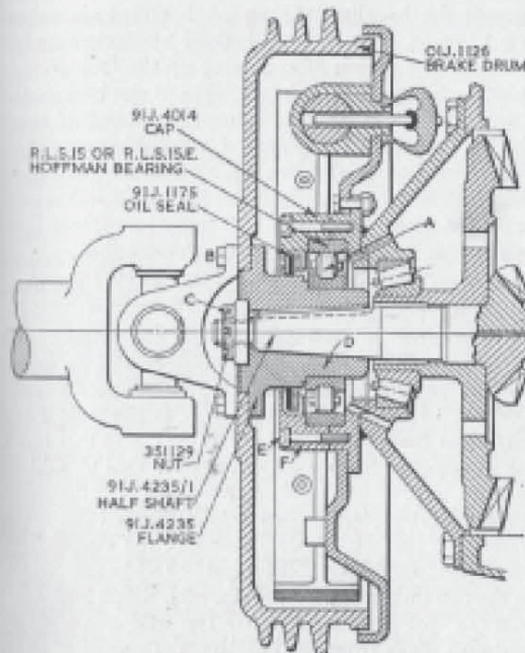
SECTION THROUGH INNER ROLLER BEARING ON DE-DION REAR-AXLE UNIVERSAL HALF SHAFTS
